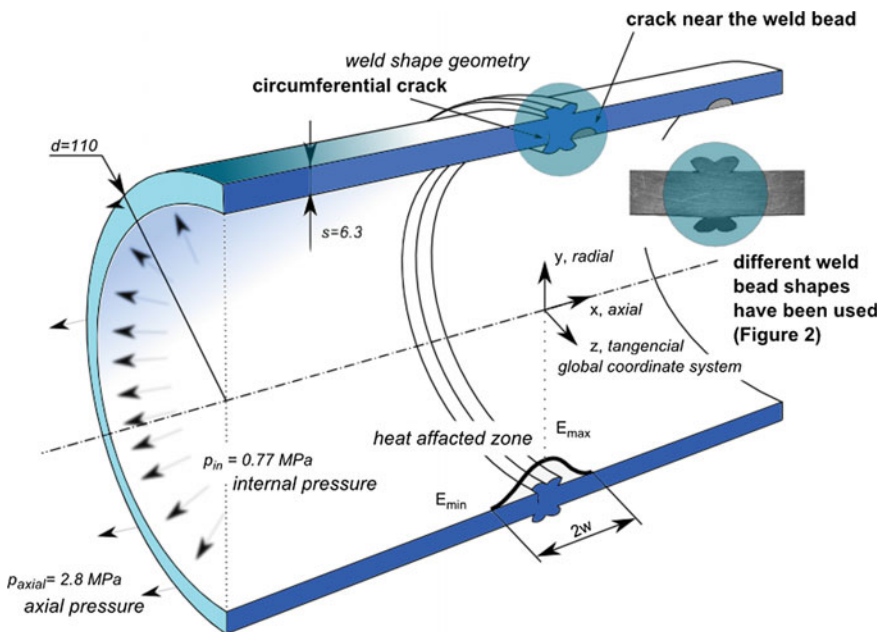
Basic geometry description of welded PE pipes with a weld bead
